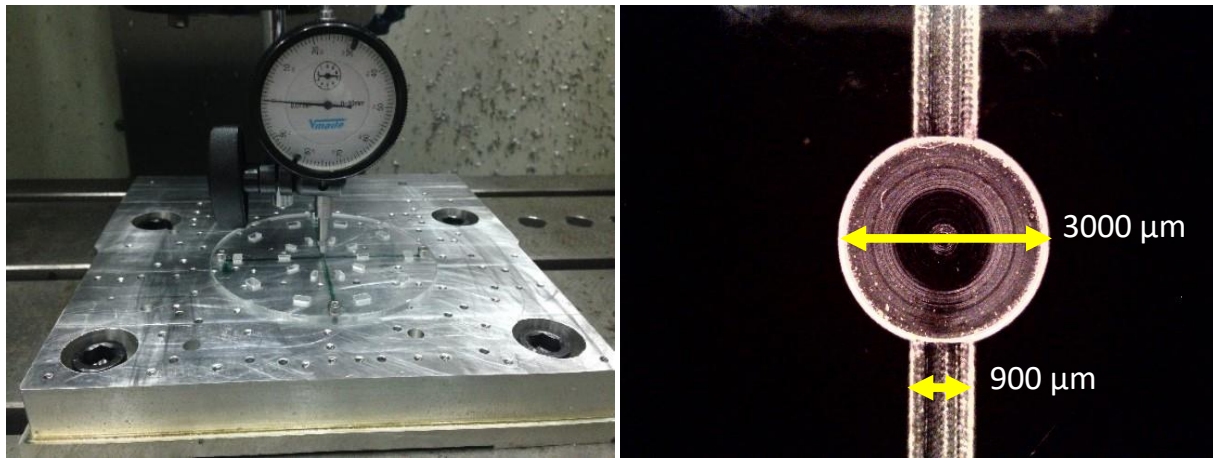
The chip channels and valve positions are machined using a jig and the depth is verified on site.
